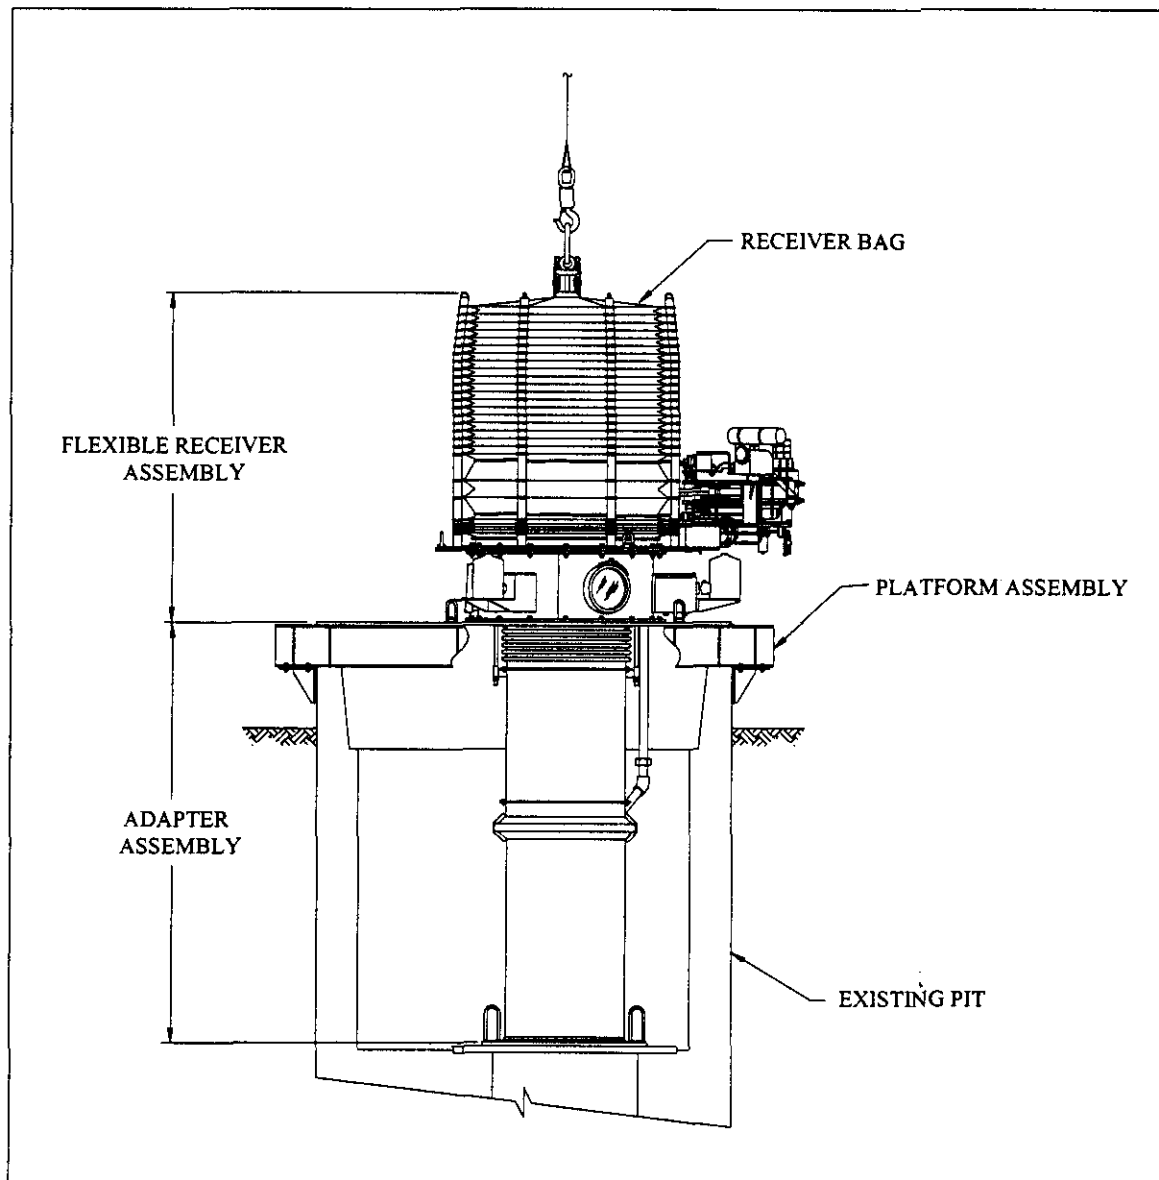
42-In. LLCE System for Equipment in Pit.
